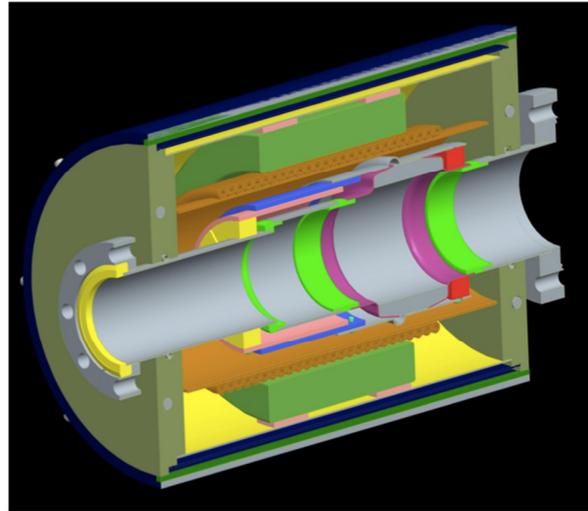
DCCT Assembly. Includes NPCT toroid, with capacitor, cooling coils, ceramic break, and magnetic shielding enclosure.
